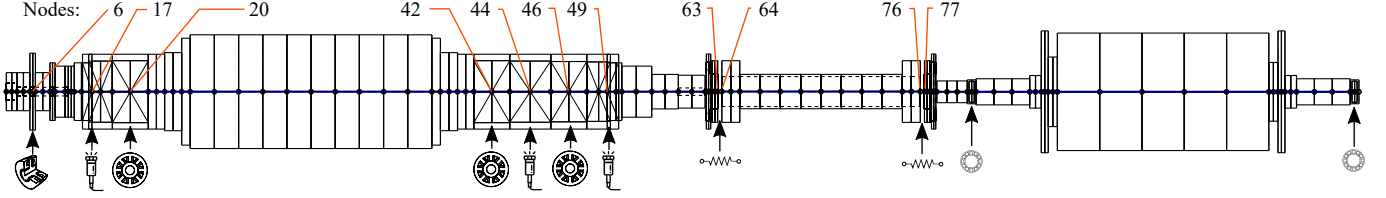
FEM model of the drive train showing the node locations of Axial AMB, sensors, radial AMBs, ball bearings in load machine, and coupling springs. The Rotatek load machine uses ball bearings with combined enforced oil lubrication and cooling enabling high speeds.
